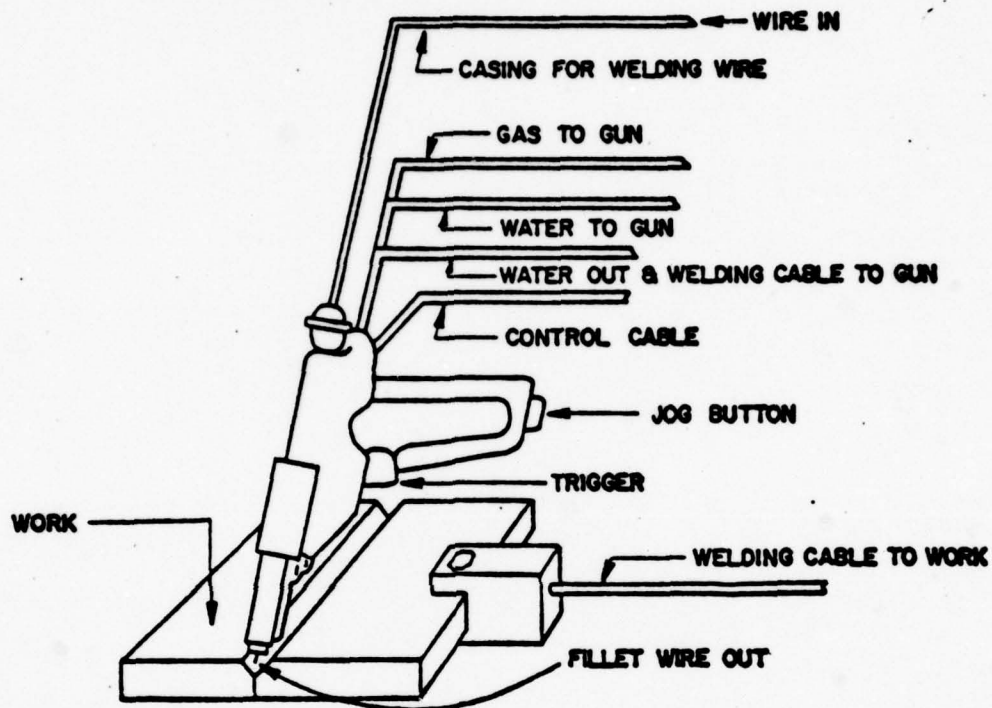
Metal Inert Gas Welding Gun with push type wire feed. This schematic represents the general orientation of the "hand held" MIG "gun" for making down hand butt welds. The stationary control unit feeds shielding gas and filler wire at a preset rate to the gun while maintaining a predetermined power input (heat input). Water is supplied to the unit for cooling. The jog button allows the welder to manually feed wire for trimming prior to initiating the arc. (Figure adapted from Reference 2.)
